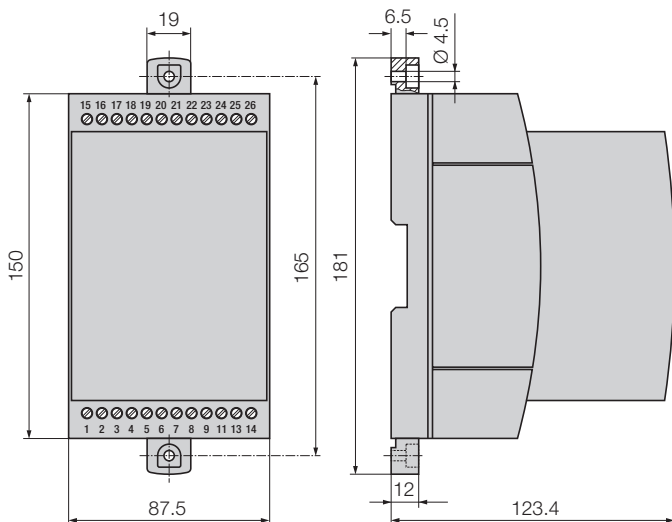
SINEAX DME 424/442 in housing T24, screw hole mounting brackets pulled out.
